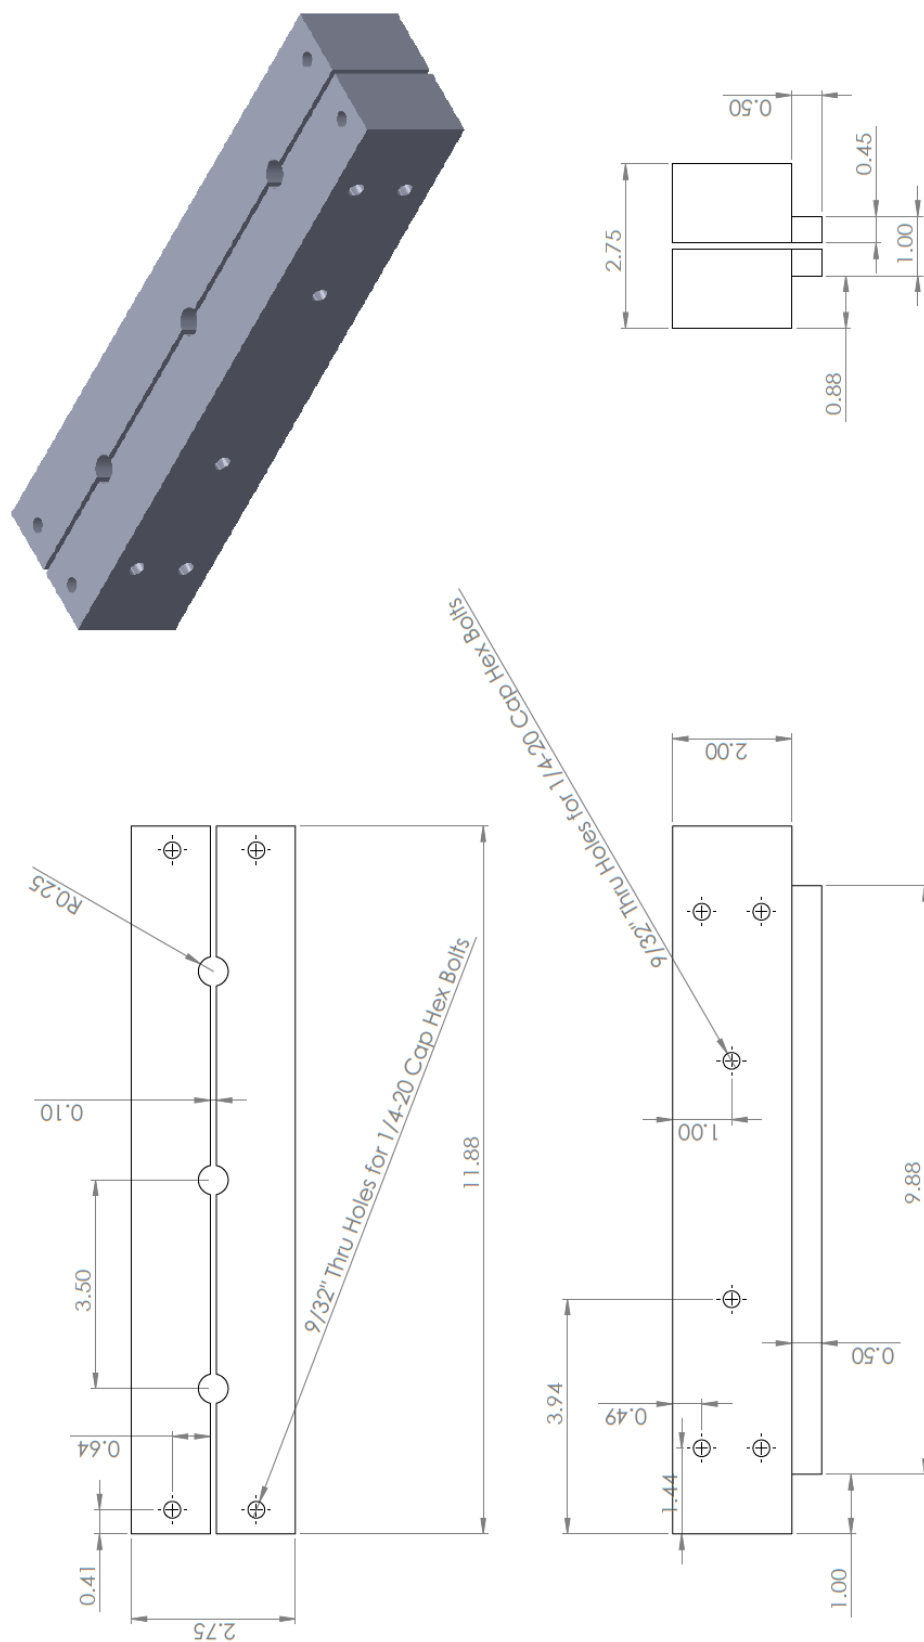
Electrode holder used in open box experiments. All nominal dimensions shown in inches.
